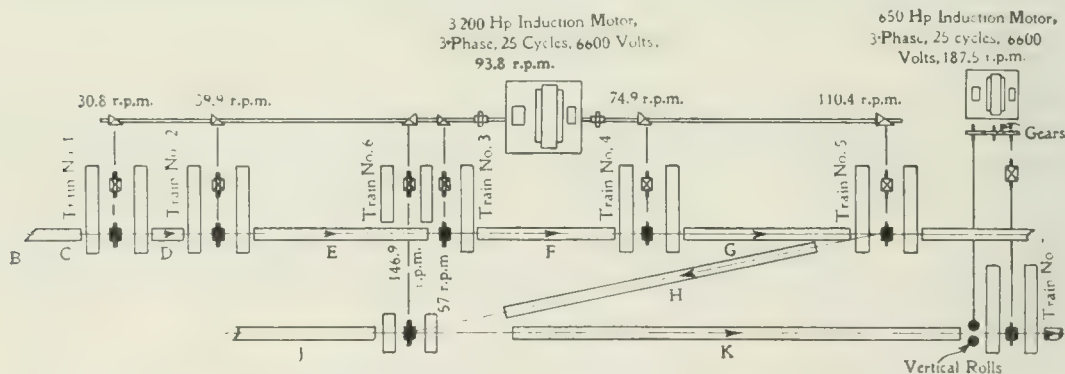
18-In. Merchant Mill of the Indiana Steel Company, Gary, Ind.
